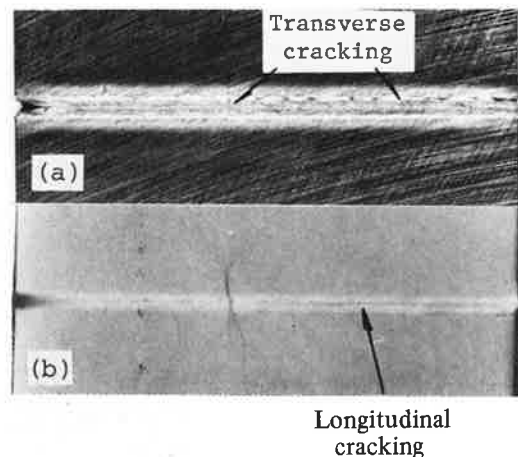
(a) General appearance of weld bead and (b) its X-ray radiograph showing transverse and longitudinal crackings and blow hole.
